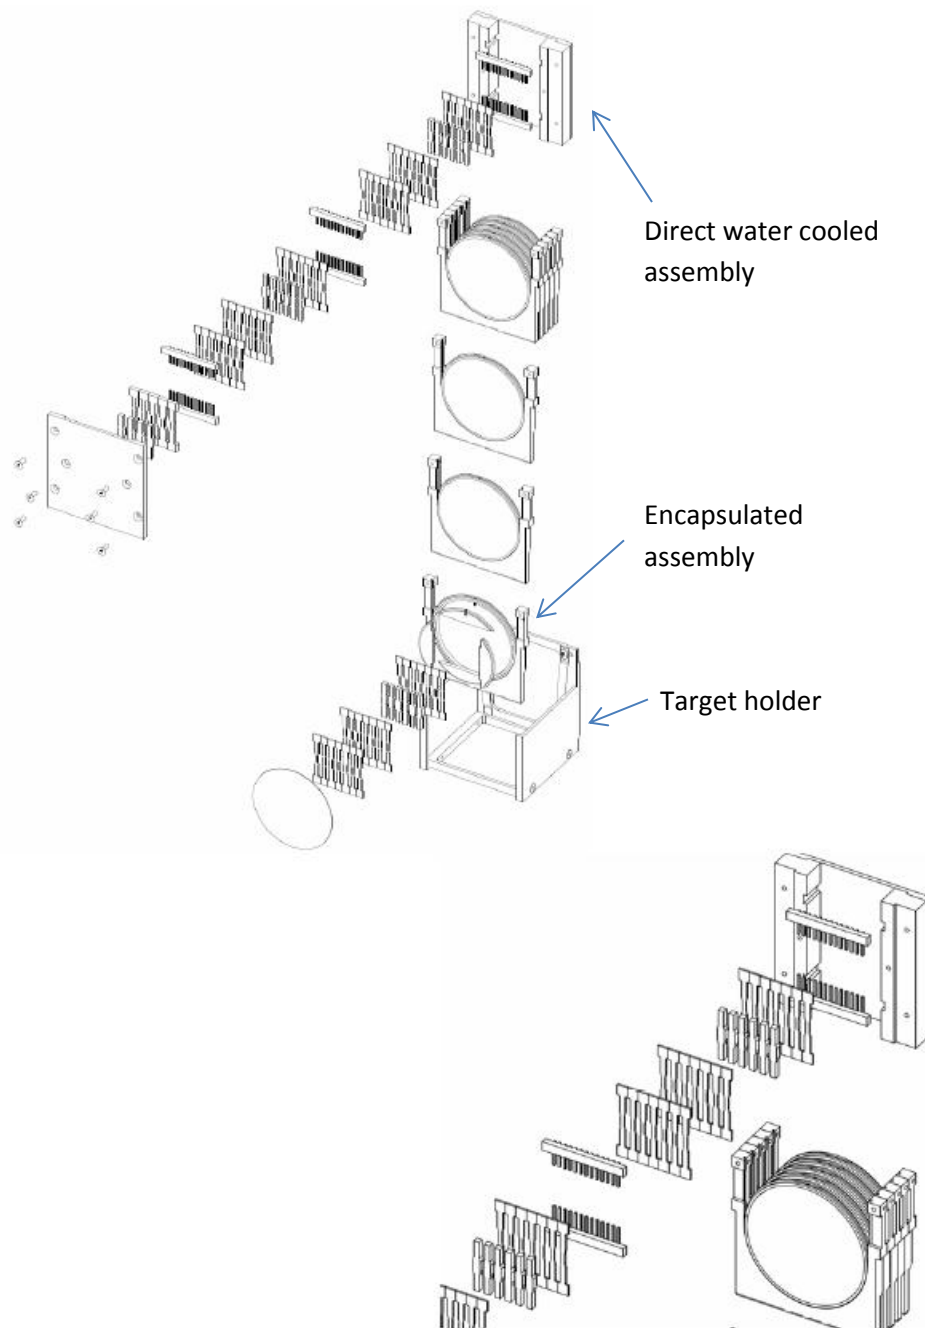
Exploded view of the target arrays and their respective holders.
